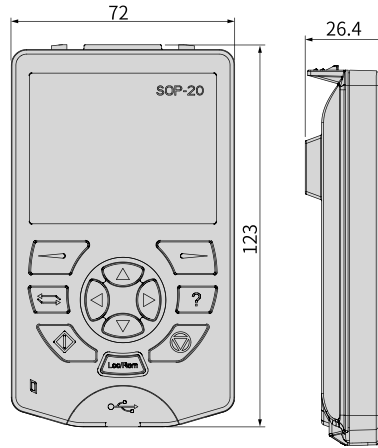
Dimensions of SOP-20-880 (unit: mm)
